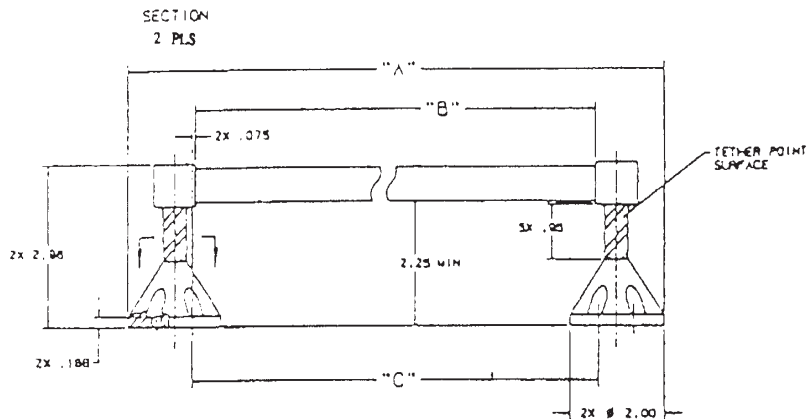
TOP MOUNTED CUSTOM LENGTH HANDRAIL ACCESS ENVELOPE
